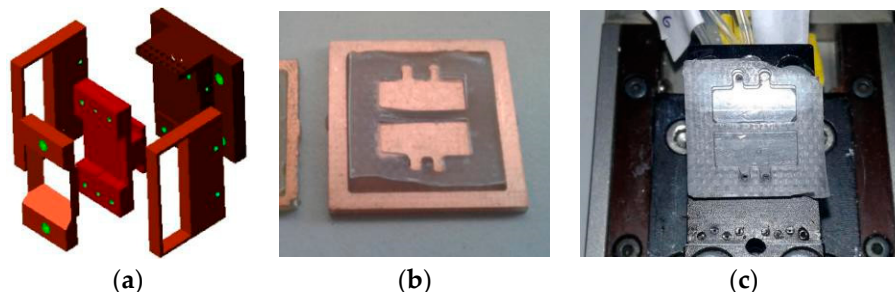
(a) Aluminium flow cell; (b) casting mold for the PDMS, using printed circuit board (PCB) technology; (c) photograph of the fabricated PDMS fluidic gasket, showing the two chambers.
